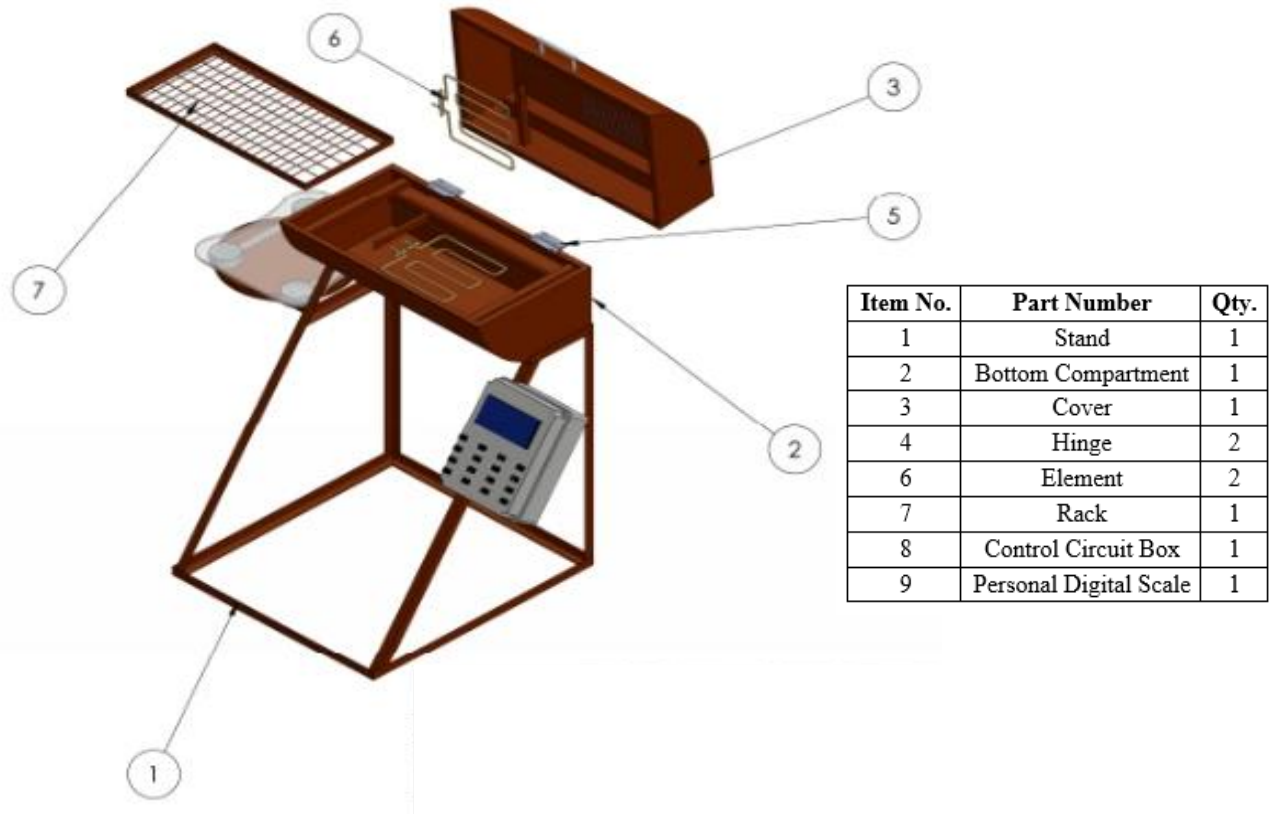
Exploded view and bill of materials of the electrically powered fish roasting machine
